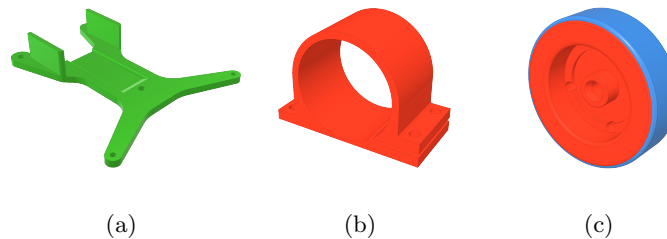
(a) Sensor and battery support. (b) Motor support. (c) Robot wheel.
